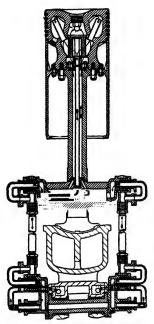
Showing piston cooling-system design, Nordberg Diesel engine.
